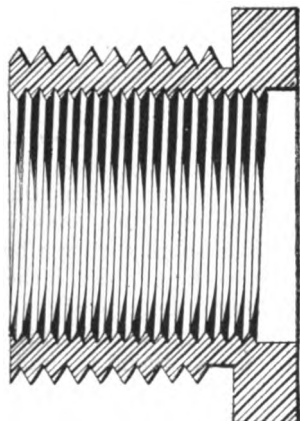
CHUCK ADAPTER FOR SMALL LATHE
